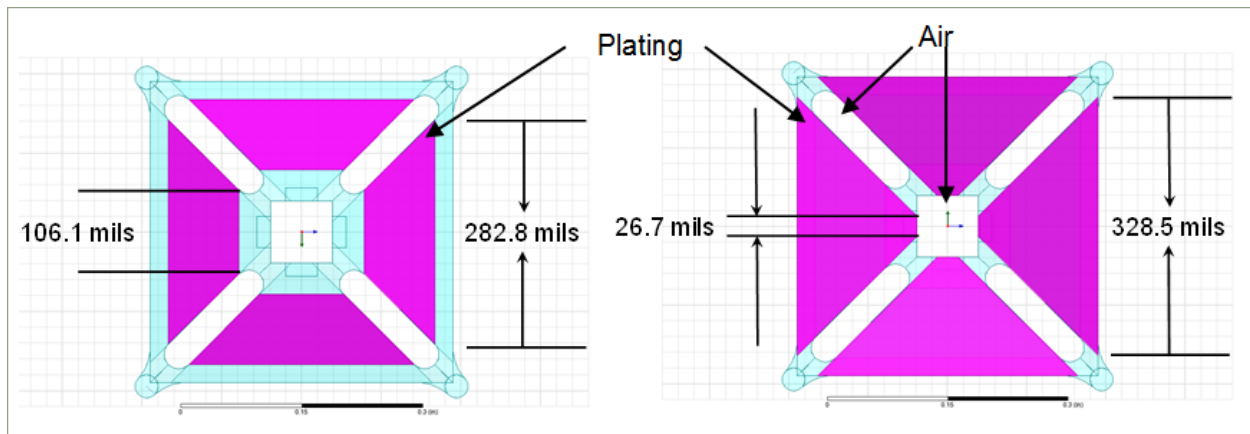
X-Band droopy bowtie subassembly: top view, plated. Left: topside plated wings; Right: bottom side plated wings
